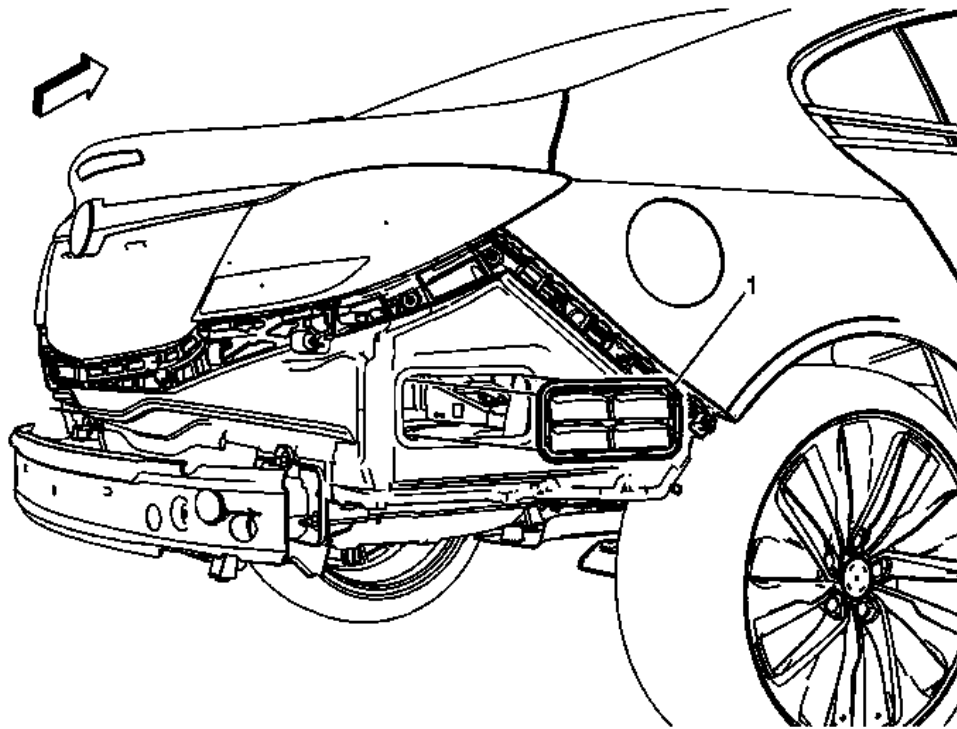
Quarter Outer Panel Pressure Relief Valve
